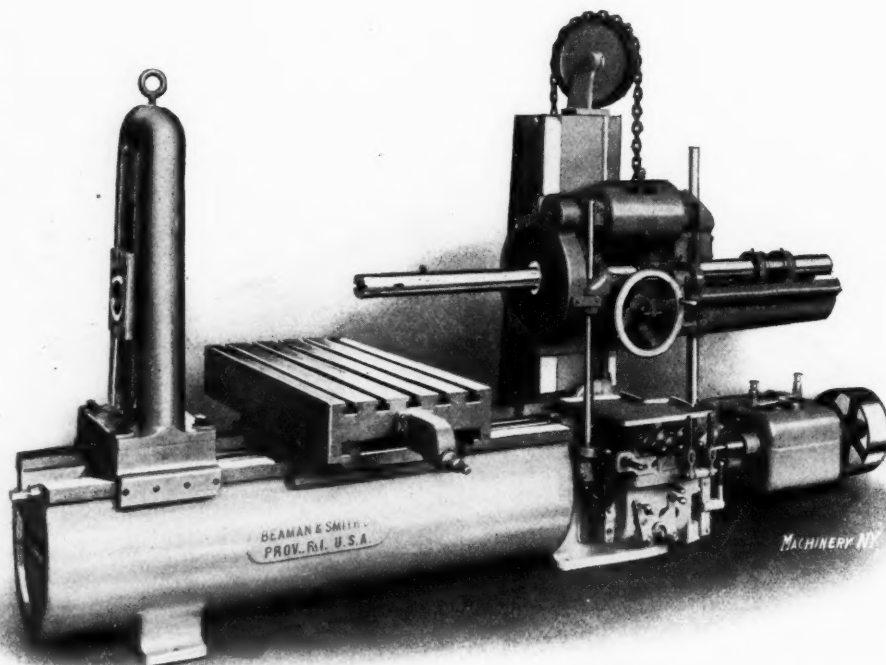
Beaman & Smith Horizontal Boring and Milling Machine
